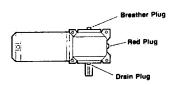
, RELOCATION OF OIL DRAIN PLUG.
